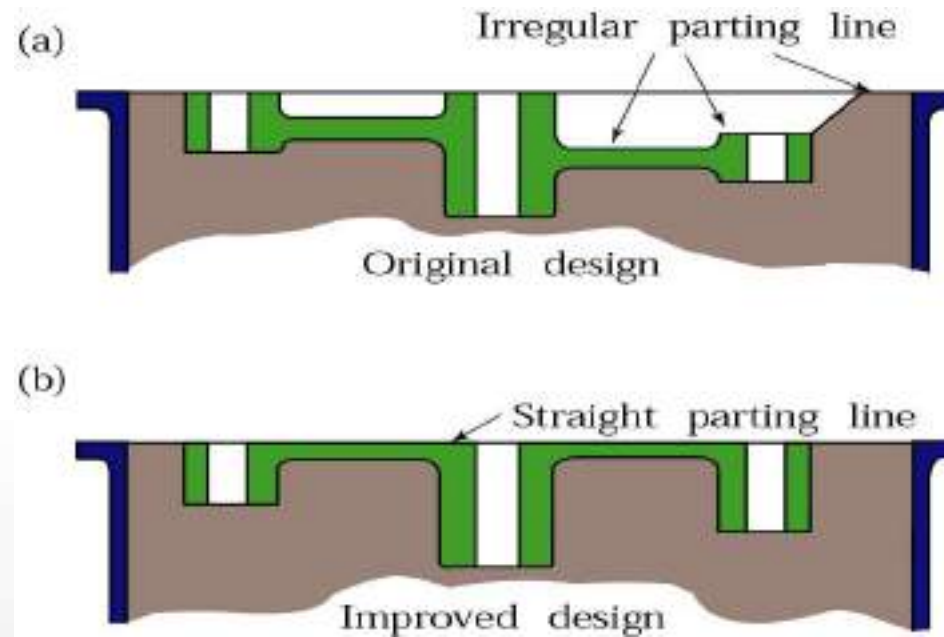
Redesign of a casting by making the parting line straight to avoid defects.
